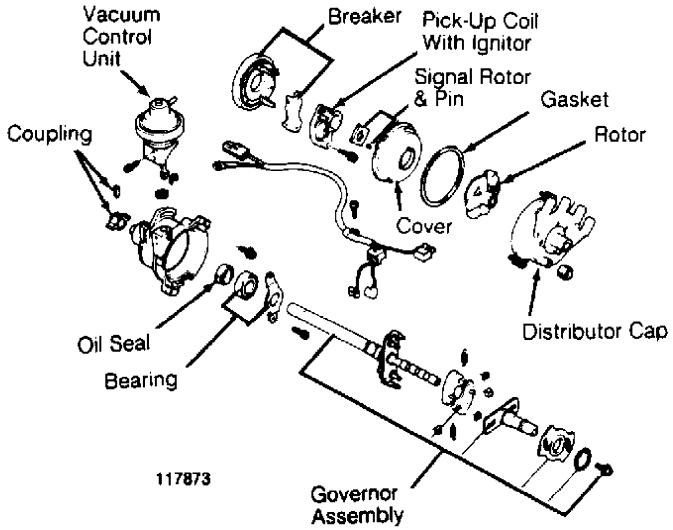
Exploded View of Distributor (MX-6 & 626 Non-Turbo) Courtesy of Mazda Motors Corp.
